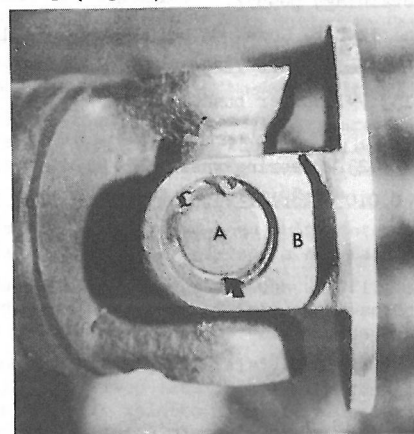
Bearing cap on propshaft U.J. showing marks caused by cap rotating against circlip. A - bearing cap, B - yolk, C - circlip, arrow - wear marks.
